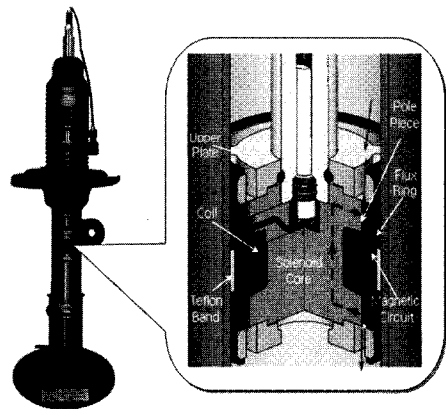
Piston valve assembly of MR CDC damper & moving path of MR fluid at the annular gap
